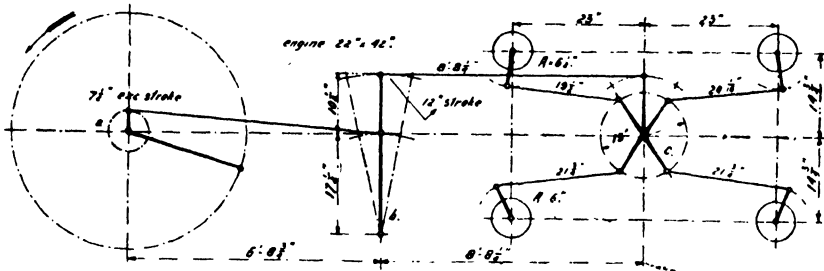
Corliiss Gear for a 22 in. x 42 in. Engine.
